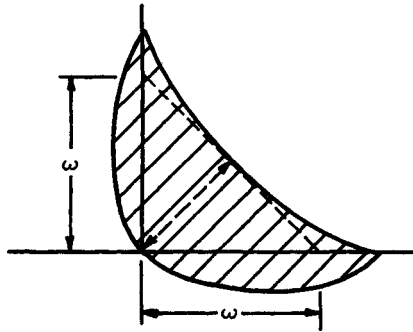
Leg size ω of a fillet weld. (*The Lincoln Electric Company.*)
